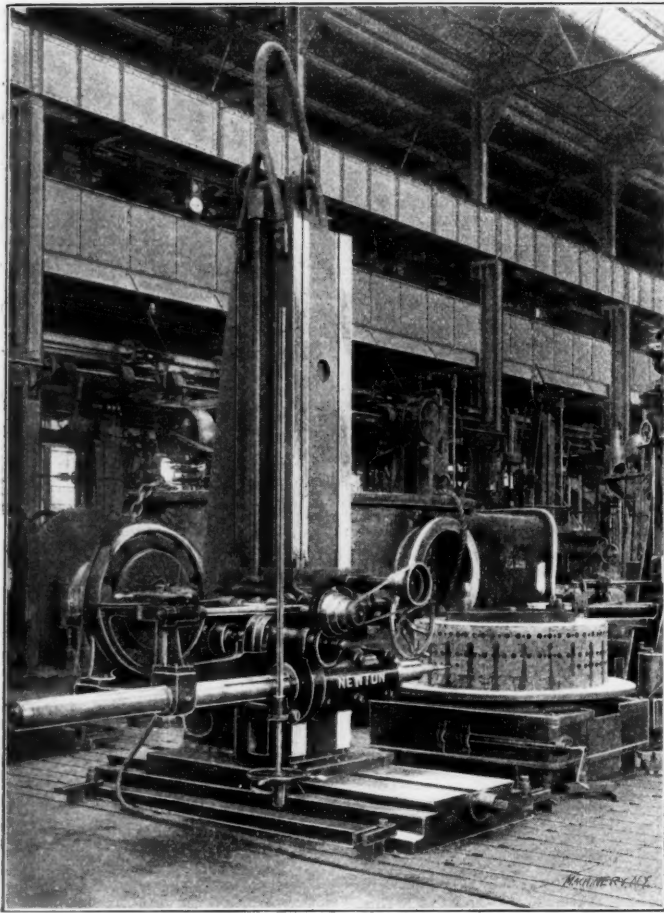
Portable Horizontal Drilling and Milling Machine, Used in Connection with Portable Indexing Device.
